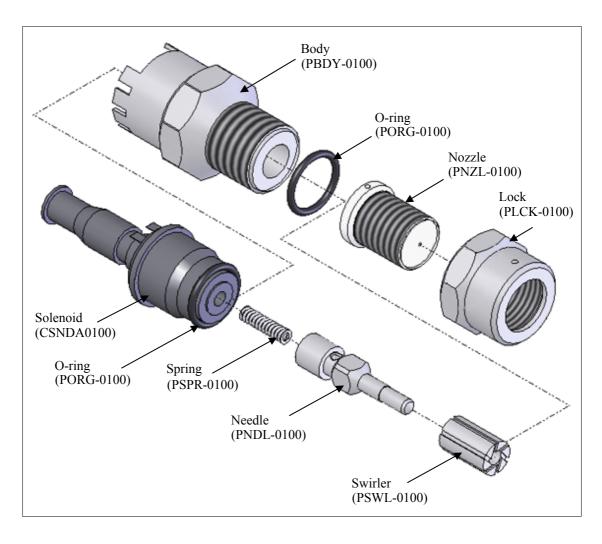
Exploded isometric view of prototype injector mark O (CINJ-0100)
